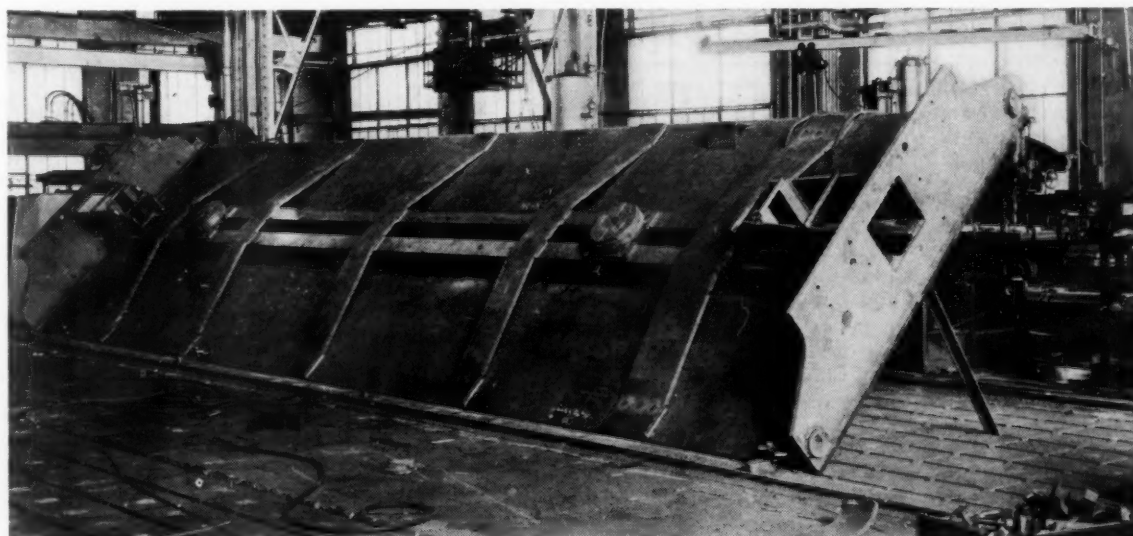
FABRICATED CAB UNDERFRAME FOR ALL-WELDED SWITCHERS
